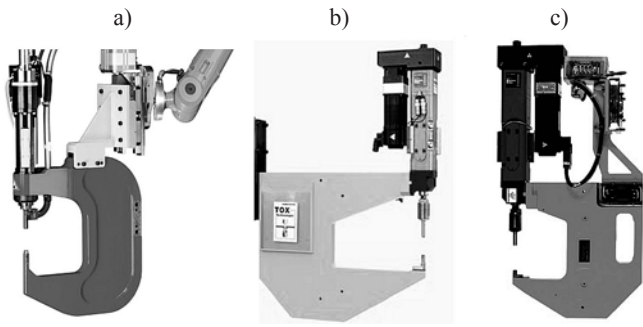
C-frames used in the industry robot manipulators: a), b) closed design, b) with opening
